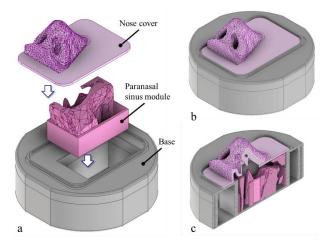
CAD images of the whole training model. a Assembly of the paranasal sinus module in the training environment, b Training environment consisting of nose cover and base module, c Sectional view into the training model.
